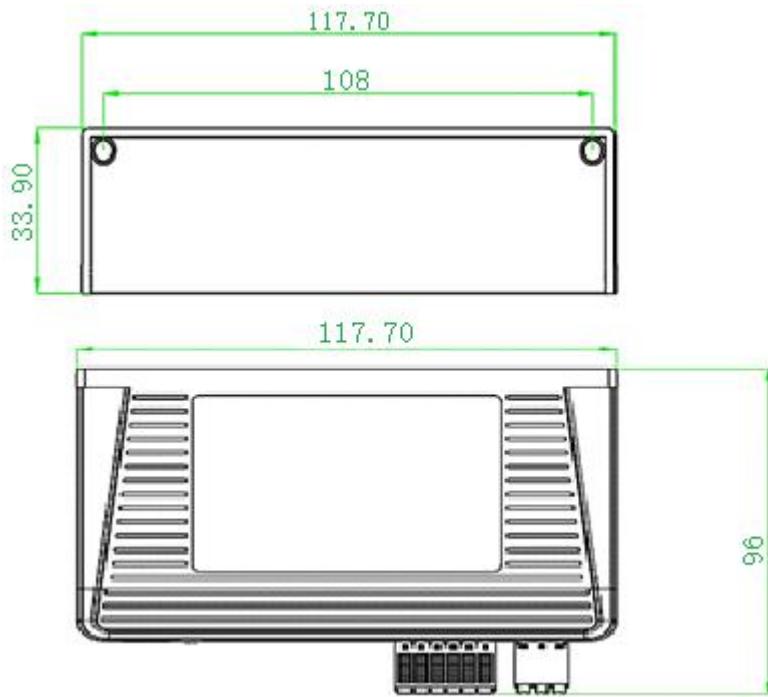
, Mechanical installation dimension drawing of 2DM522-EC (unit: mm)
